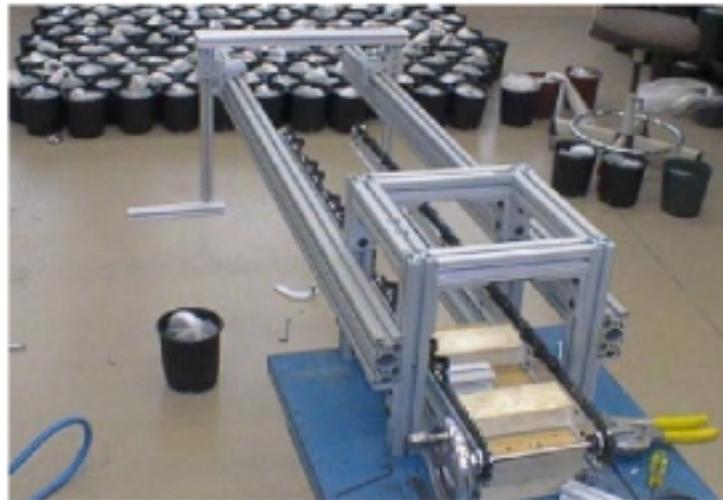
Loading-Head system in the pre-prototype, partial assembly stage
